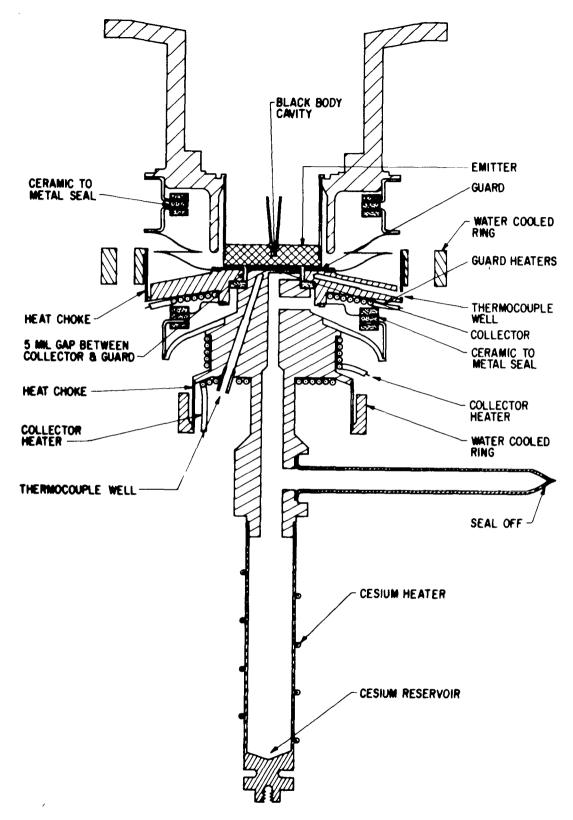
CROSS SECTION OF Nb, ALL WELDED, PLANAR CONVERTER
